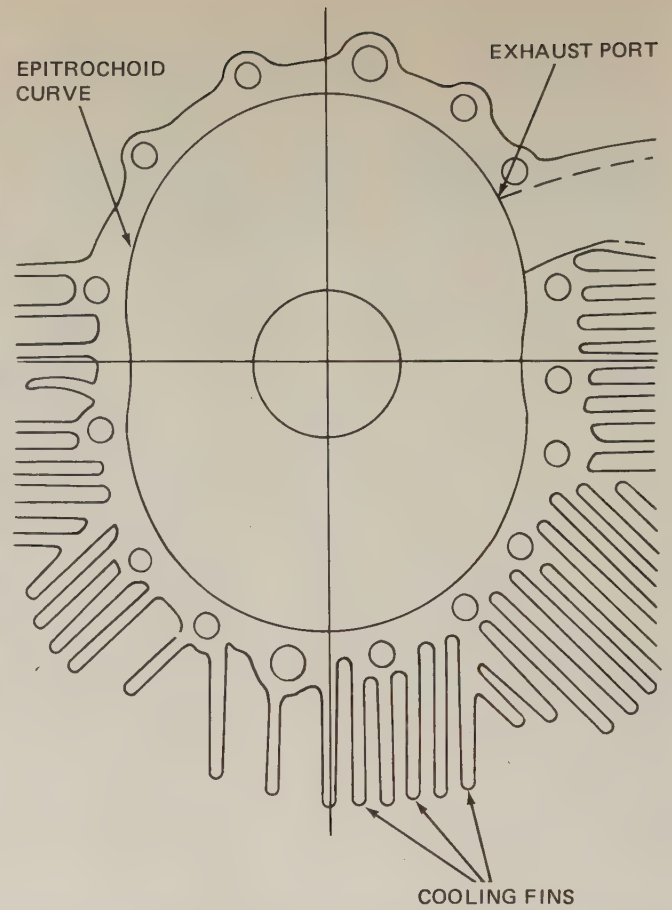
Rotor housing. (Yanmar Diesel Engine Company, Ltd.)
